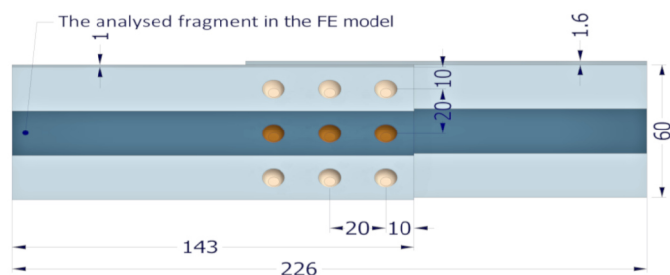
Geometry and dimensions (mm) of riveted lap joints adopted in the FE models
